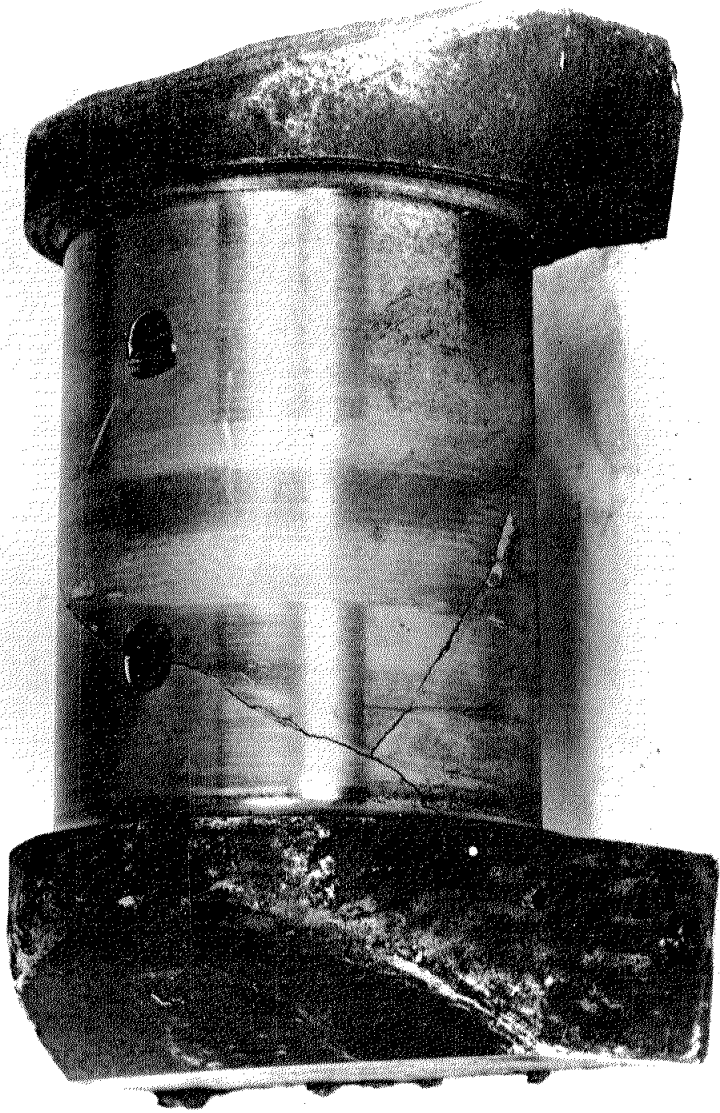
Torsional Fatigue Failure of Crank Shaft. Failure started at oil hole in crank pin of internal combustion engine.
